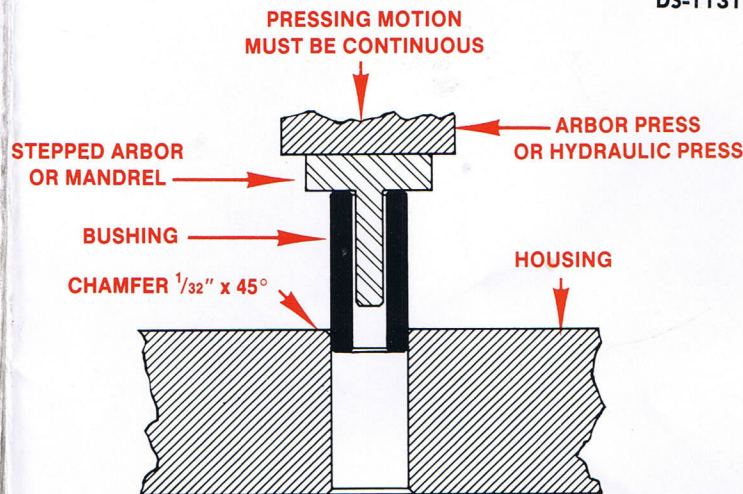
Normal Method of Pressing GRAPHALLOY Bushing into Housing by Arbor Press or Hydraulic Press
